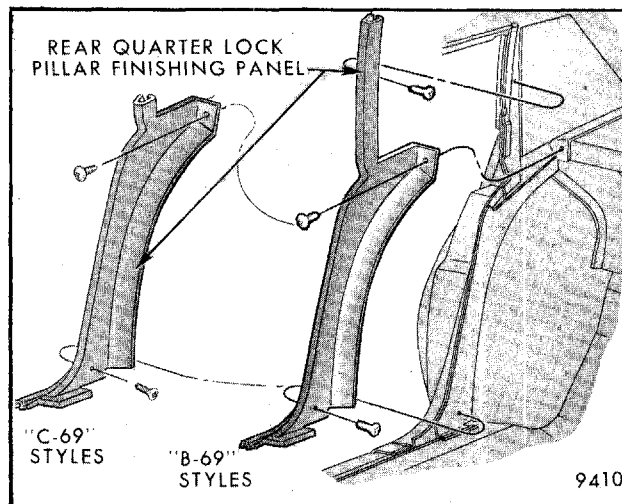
Quarter Trim Assembly Attachment - "B and C-69" Styles
